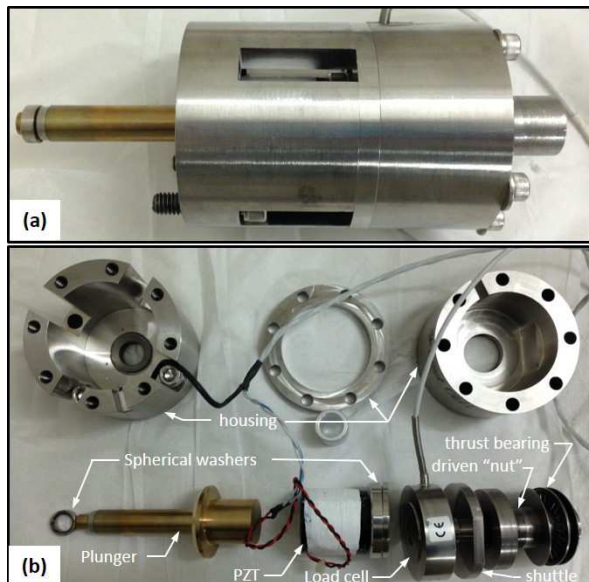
(a) Prototype tuner compression plunger assembly. (b) Disassembled plunger assembly.
